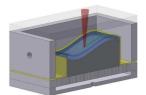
pressure chamber Figures of the different clamping concepts for laser welding of polymeric parts
